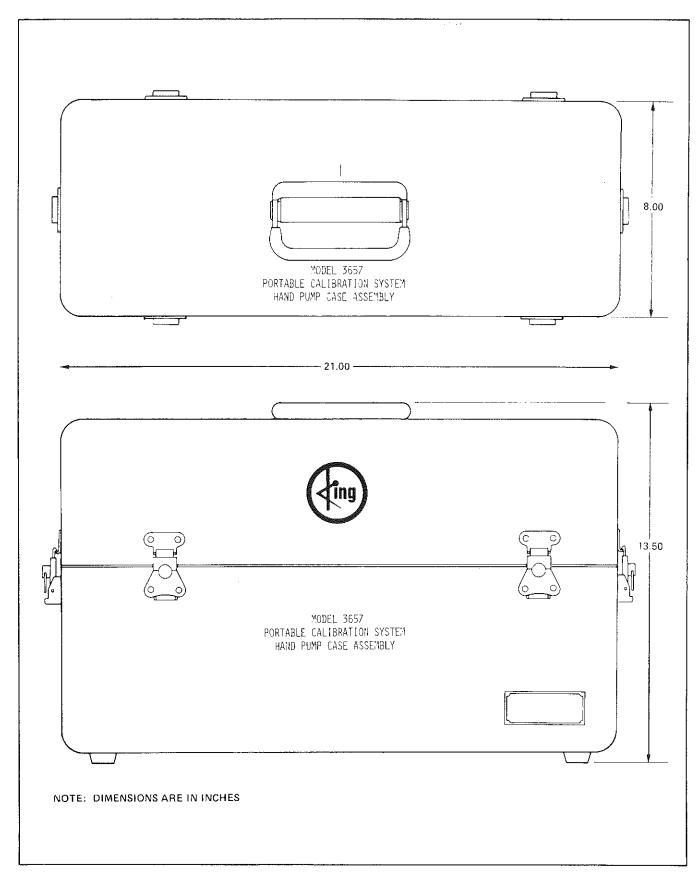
Installation Drawing — Hand Pump Case Assembly
